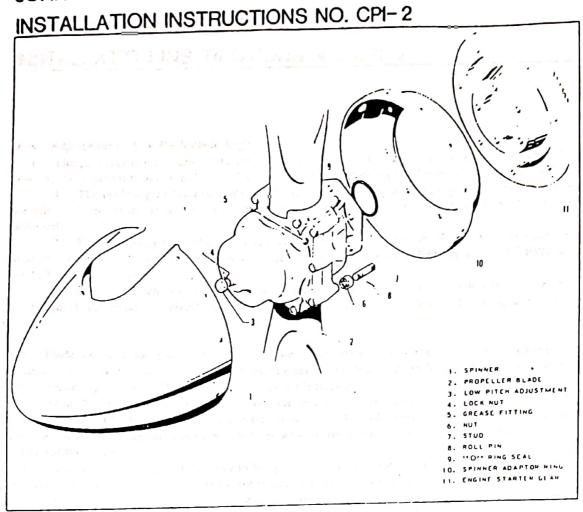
PROPELLER INSTALLATION (HARTZELL) PA-24-250 (MODIFIED)
